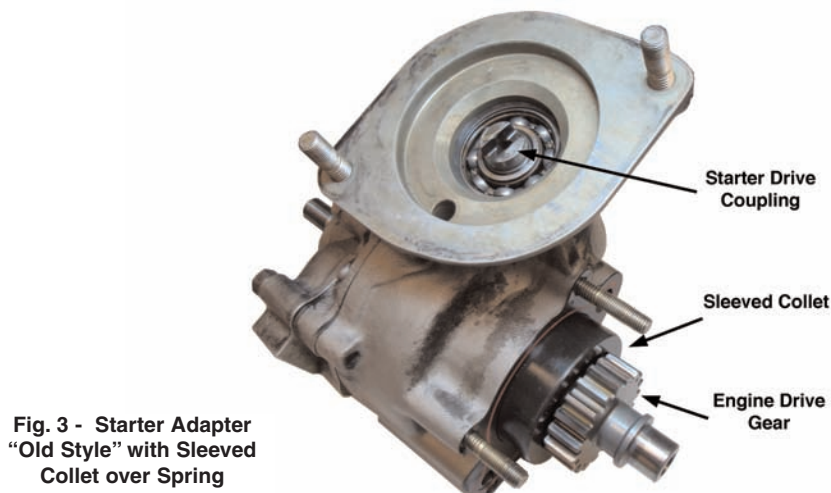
Starter Adapter "Old Style" with Sleeved Collet over Spring
